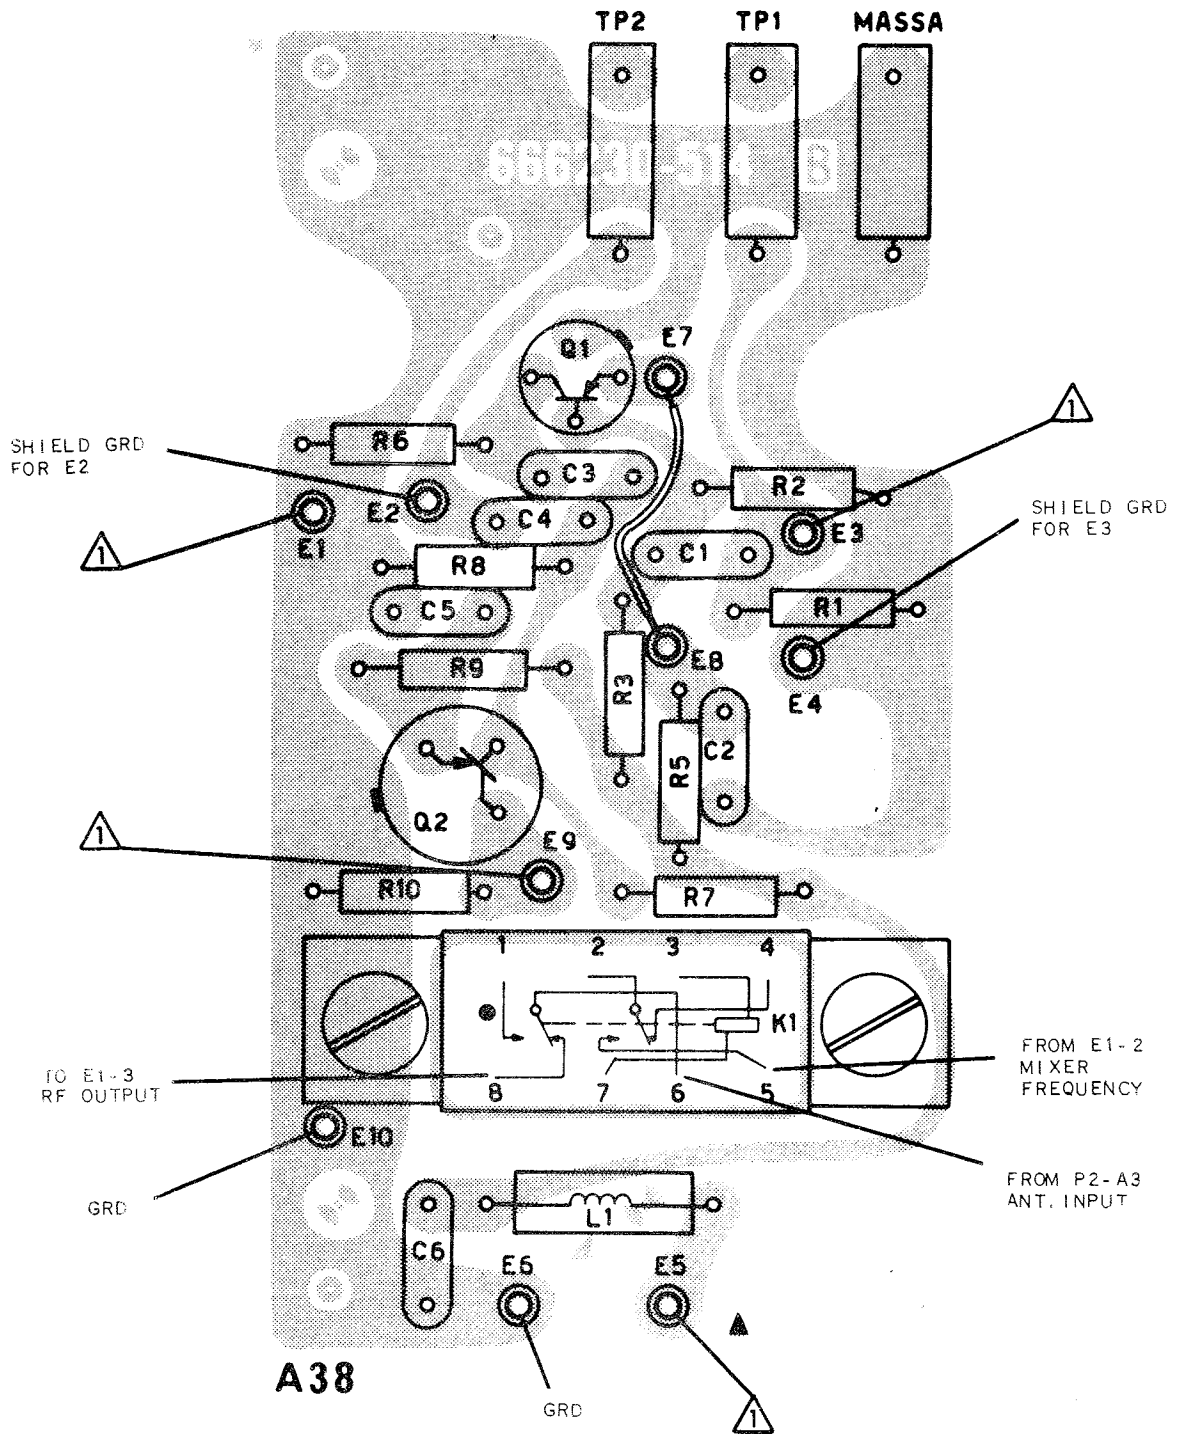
RF Amplifier Electronic Assembly, Turret Removed, Rear and Right Side, Component Location
